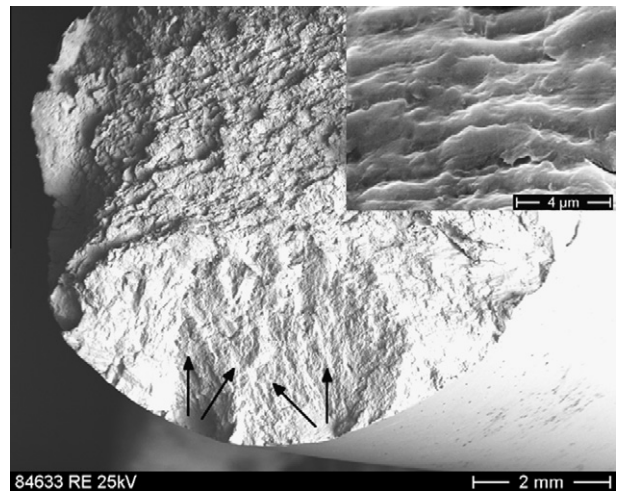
Fracture surface of specimen P1B after final fracture. The striations are found 1 mm below the specimen surface. The arrows indicate the origins of two fatigue cracks.
